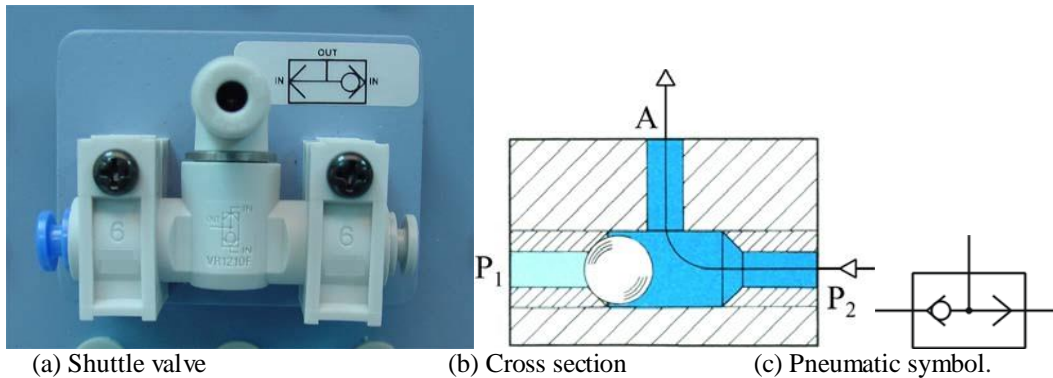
A shuttle valve with its cross-section drawing and pneumatic symbol [15].
